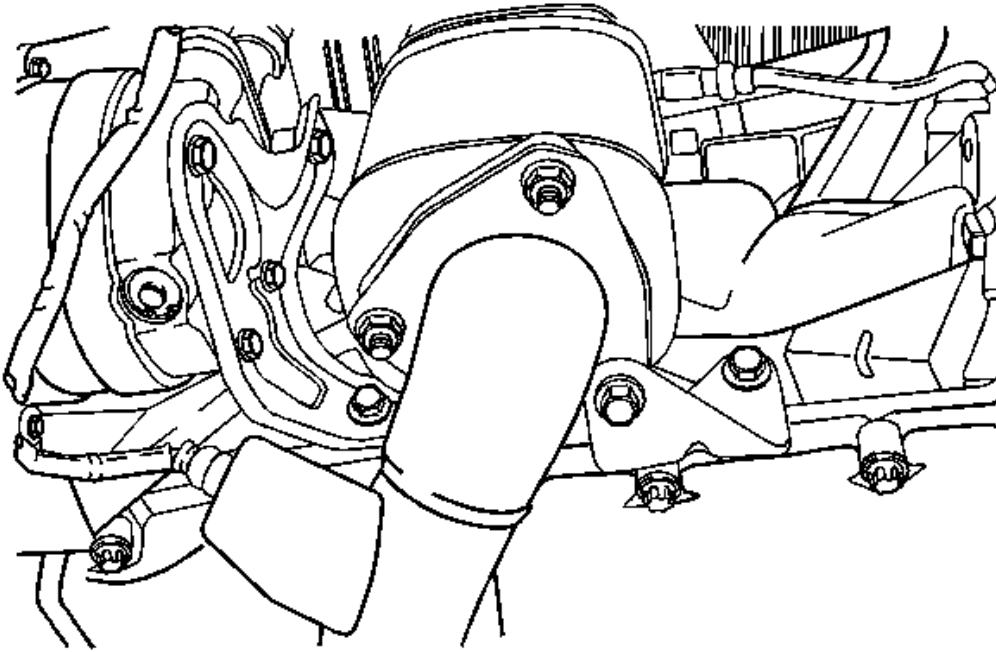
View Of Exhaust Flex Pipe And Retaining Nuts
